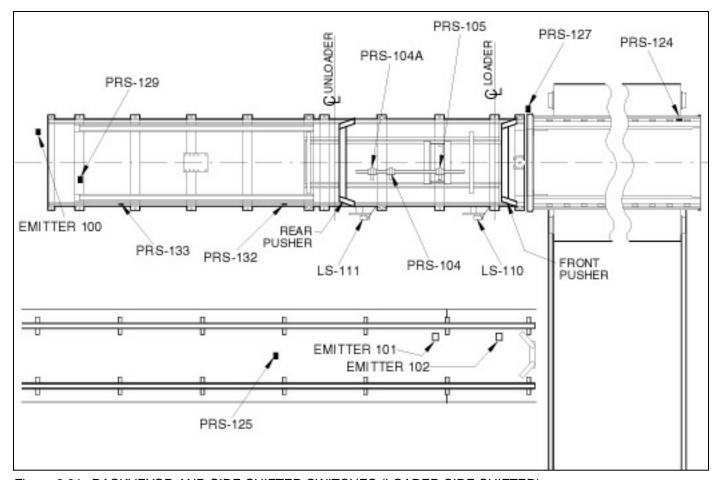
RACKVEYOR AND SIDE SHIFTER SWITCHES (LOADER SIDE SHIFTER).
